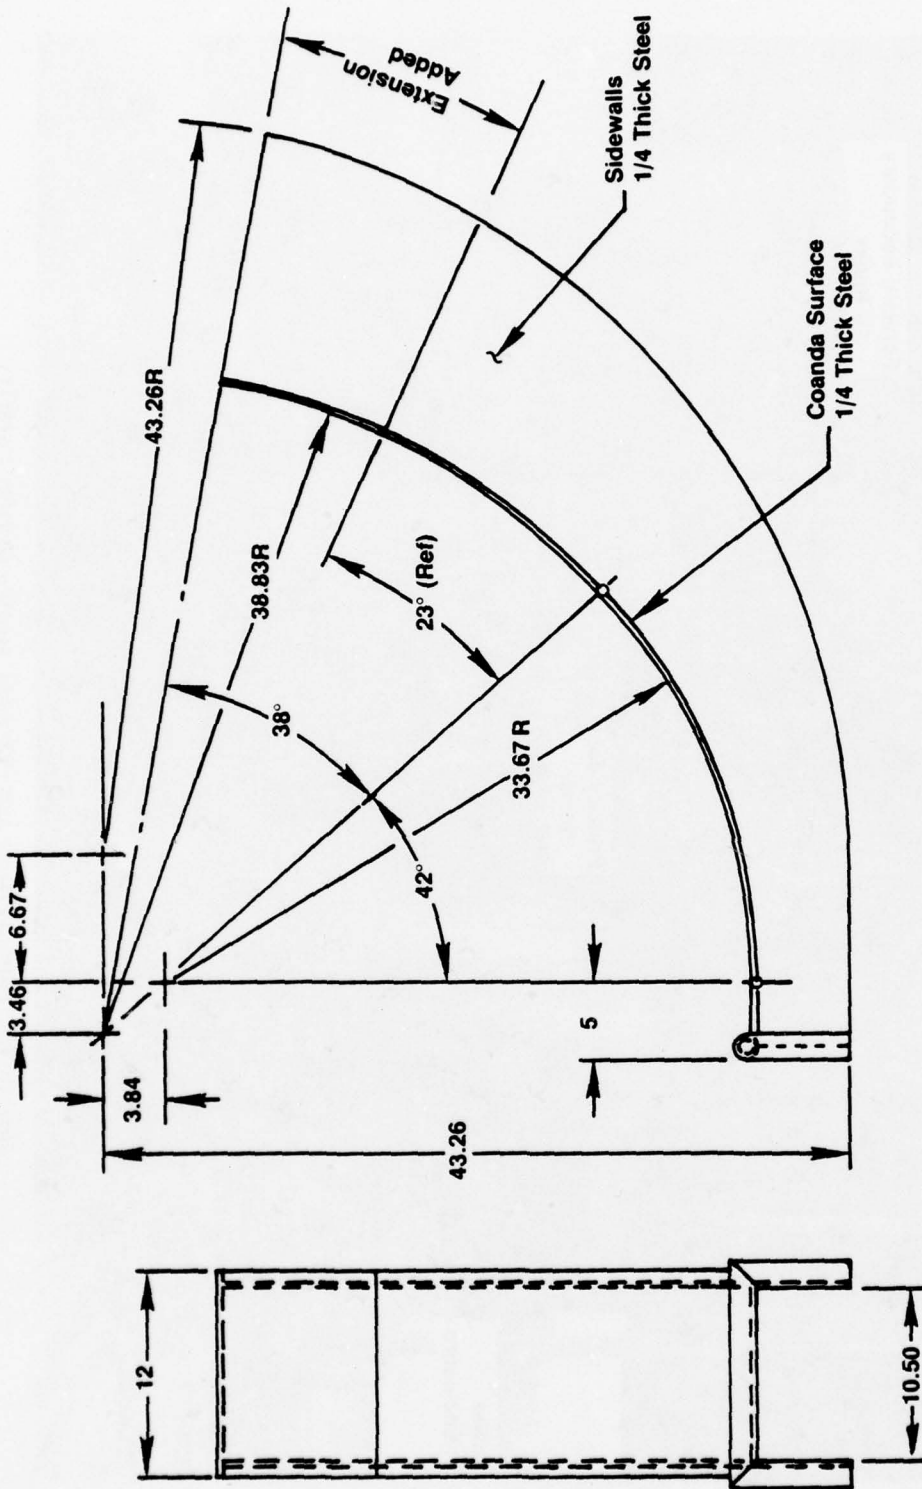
DIMENSIONAL DRAWING OF SCALE MODEL COANDA SURFACE
